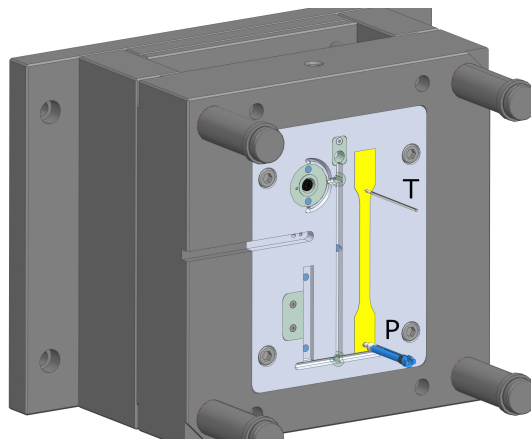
Machined mold and Sensor position on test specimen (where P indicates pressure sensor while T indicates temperature sensor respectively).
